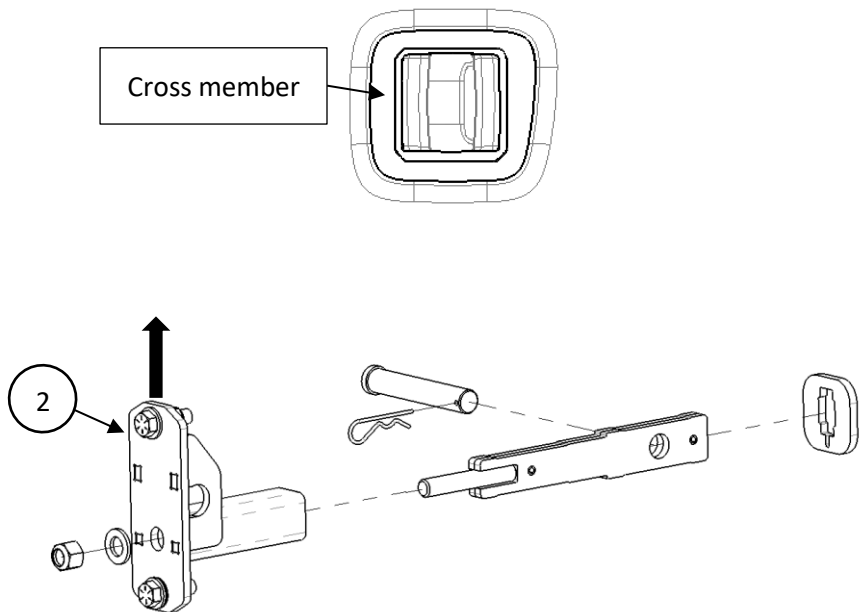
Mounting assembly for Peterbilt 567 and Kenworth T800 & T880 OEM bumper receiver holes with cross member A (driver side shown).
